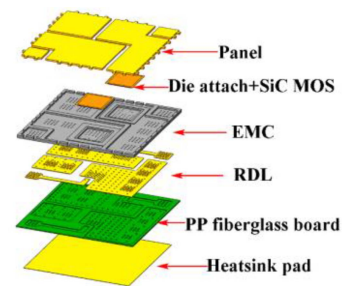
3D exploded view of embedded packaging cell for panel carrier.
